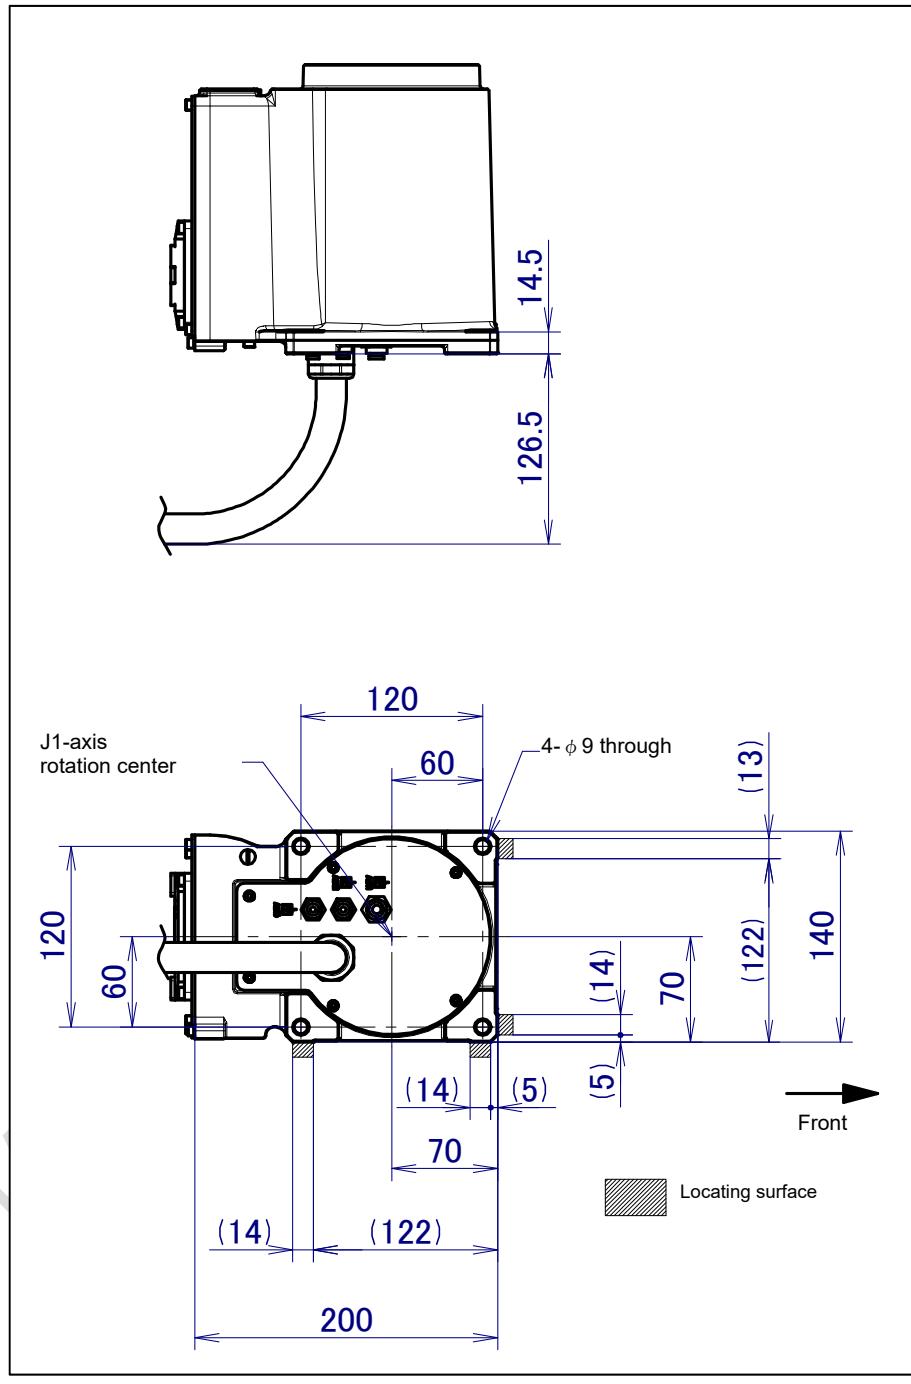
(c) Dimensions of the robot base (bottom side connector plate) (SR-3iA, SR-3iA/H)
